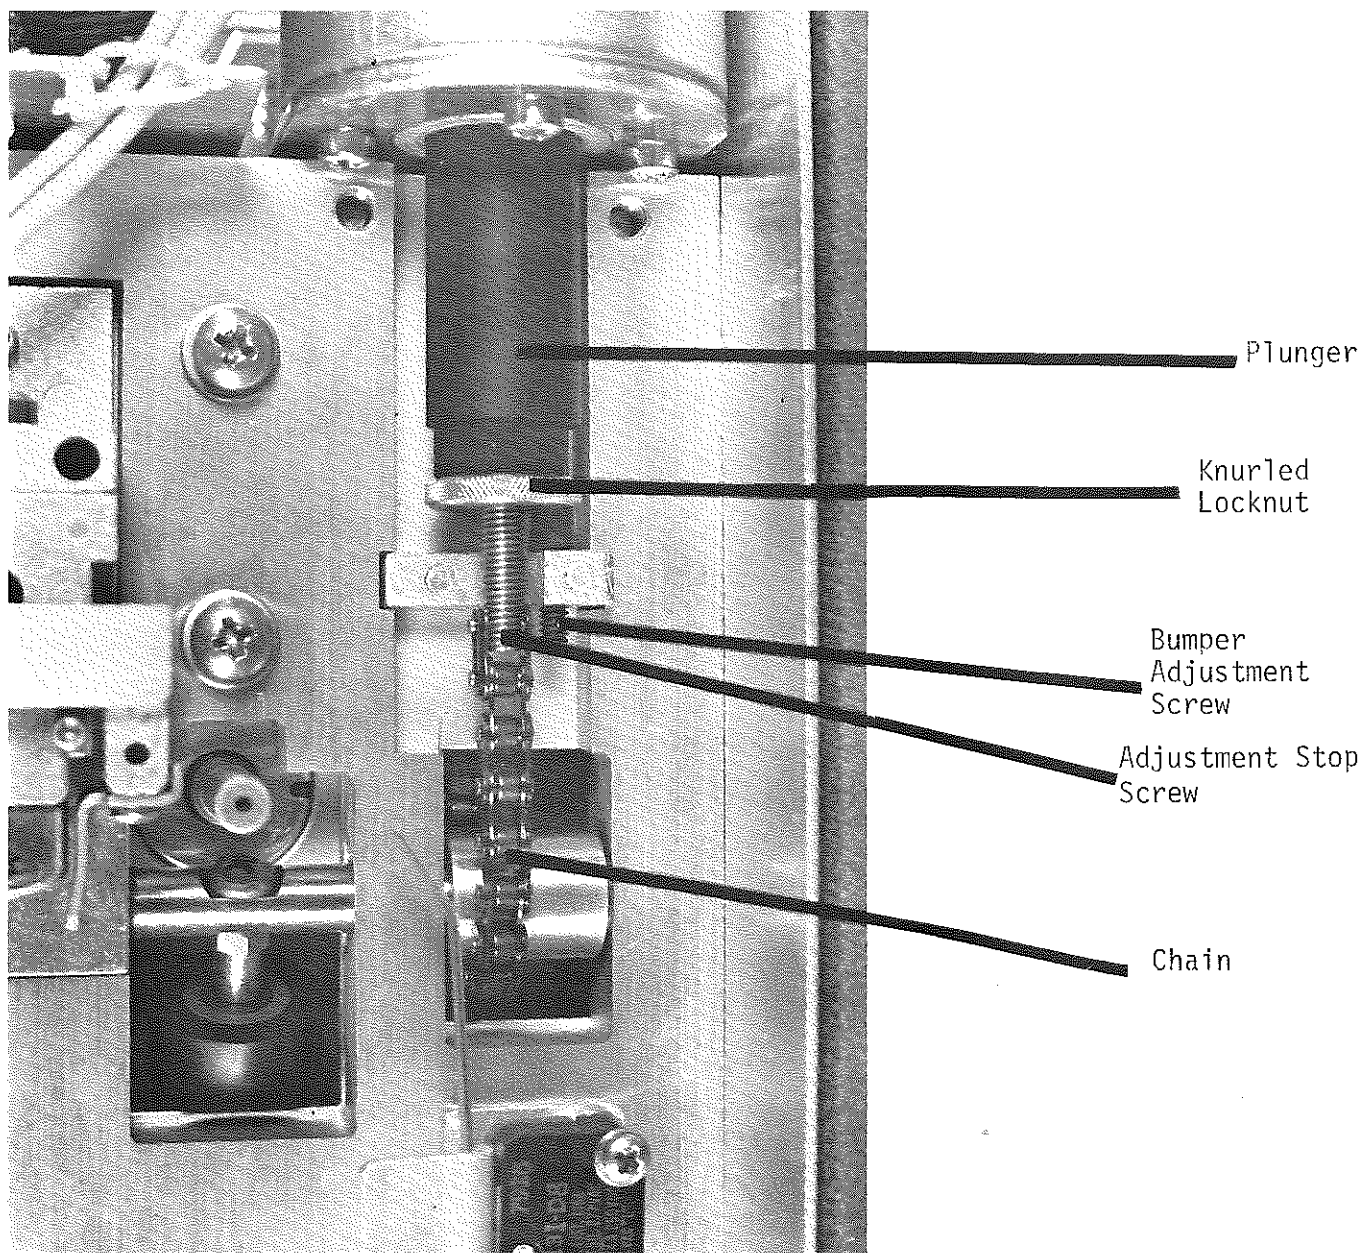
LOCATION OF SOLENOID PARTS
